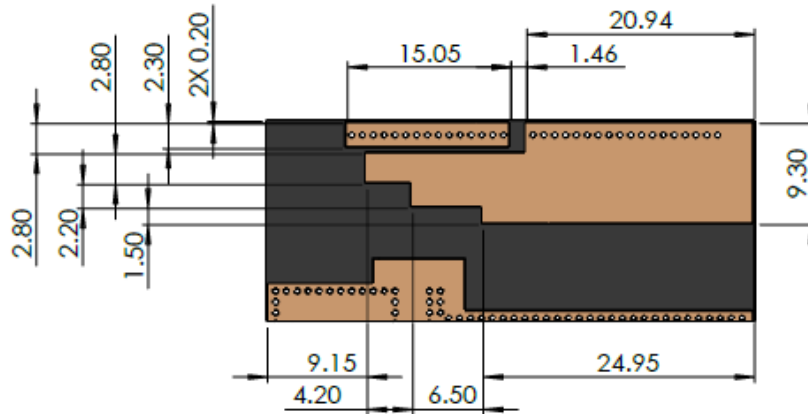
Footprint of the AC31700-01A on the bottom PCB layer.
